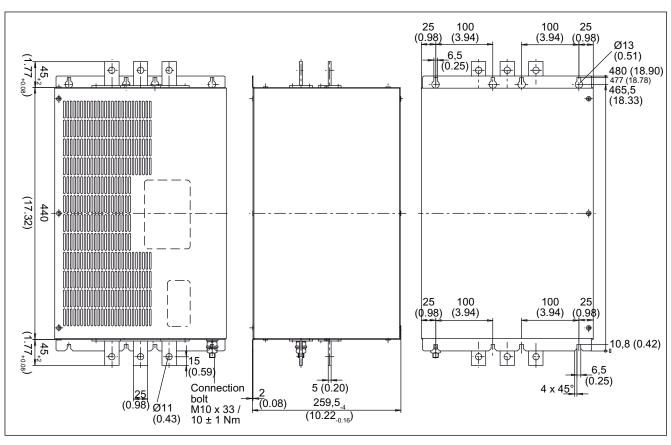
Dimension drawing of Wideband Line Filter 120 kW for Active Lines Modules, all dimensions in mm and (inches)
